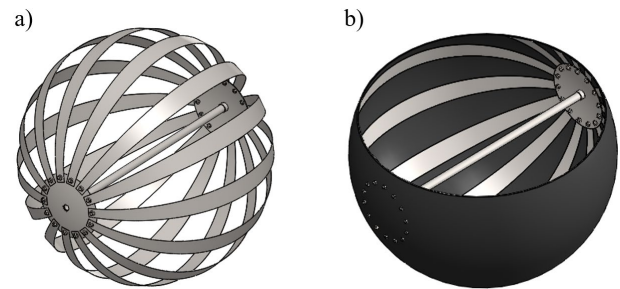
Design of the spherical shell. a) Inner frame; b) section of the shell
